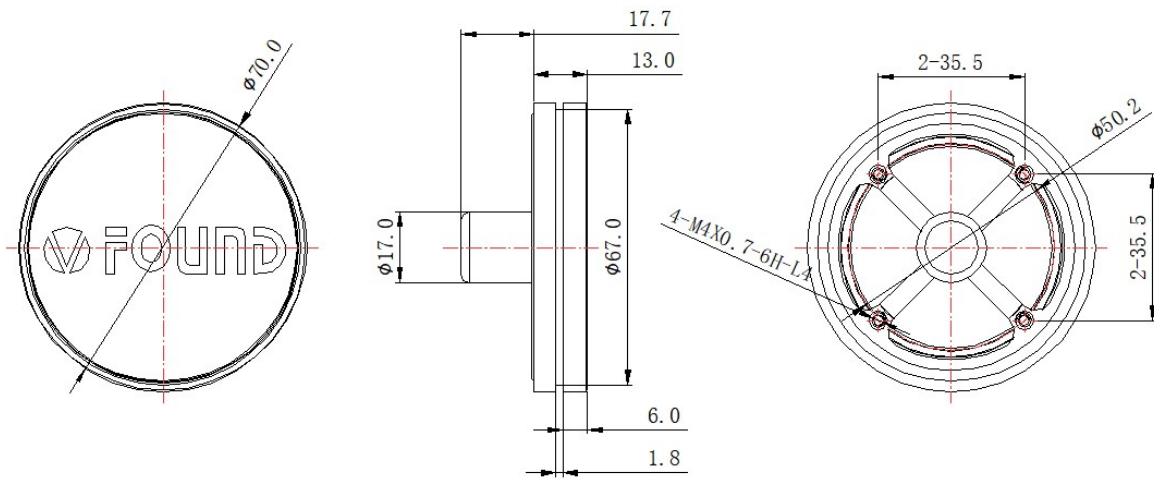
Explosion Relief Valve Schematic Diagram
